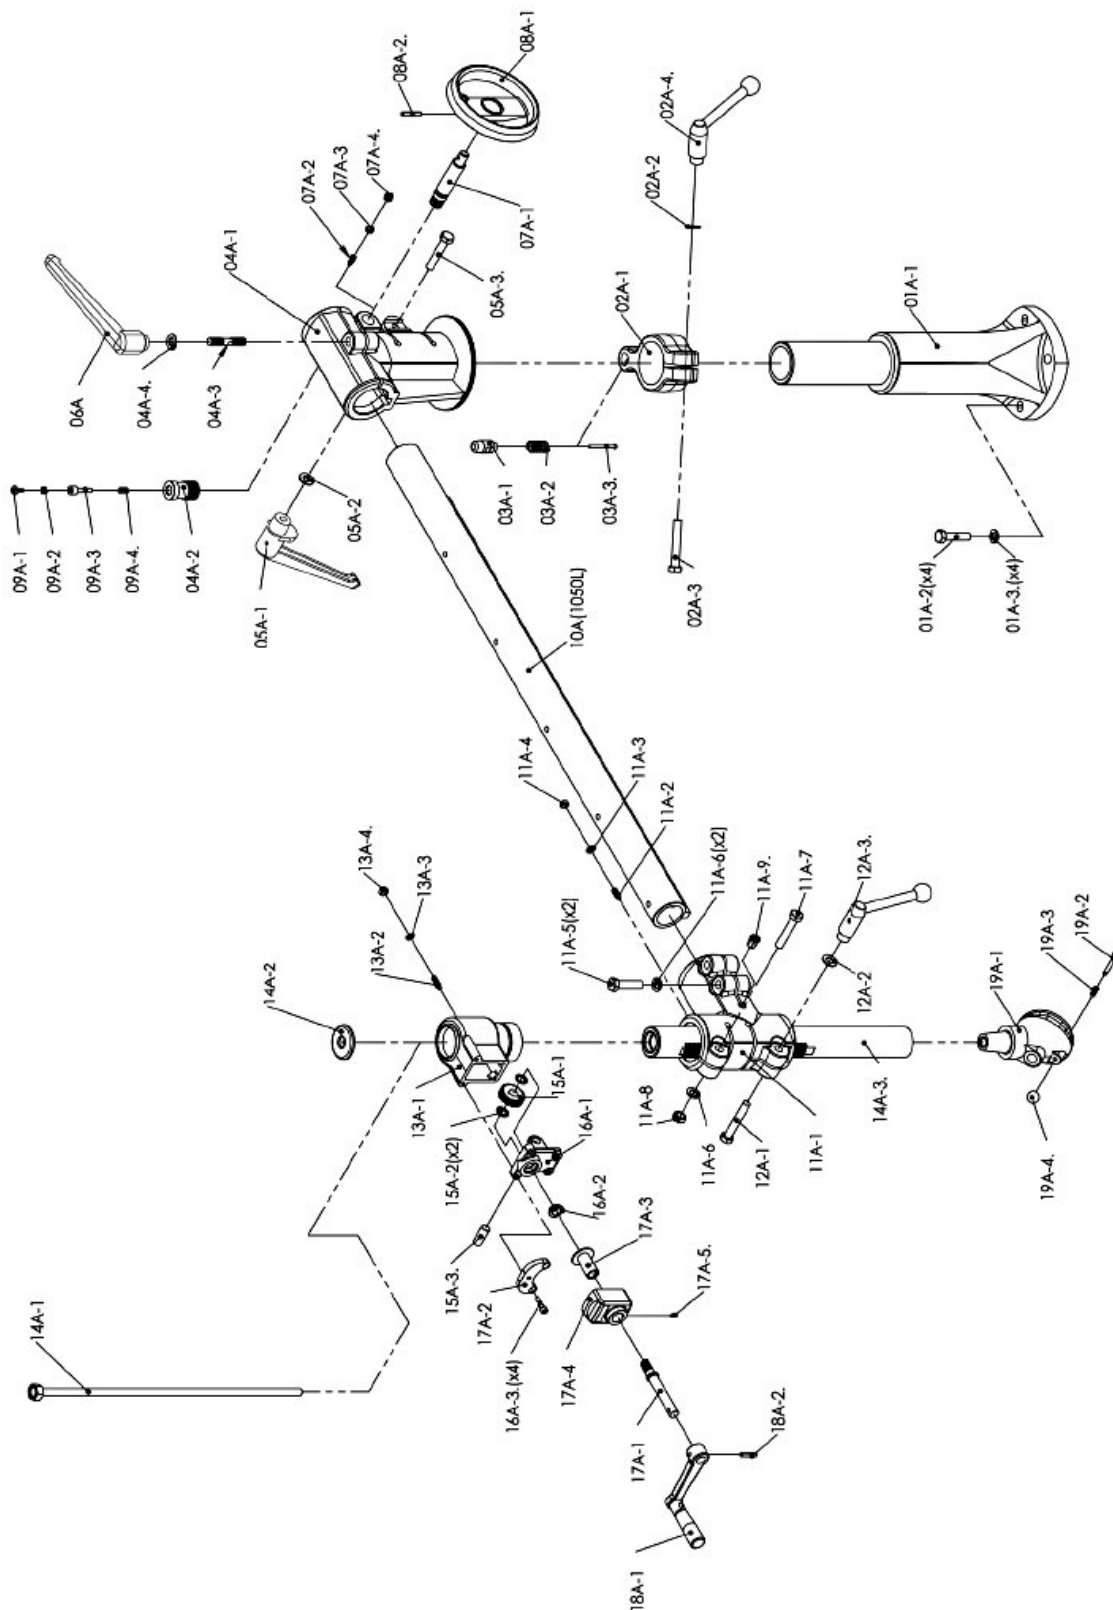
Spare parts drawing 2 - tripod of feed unit VSA 400
